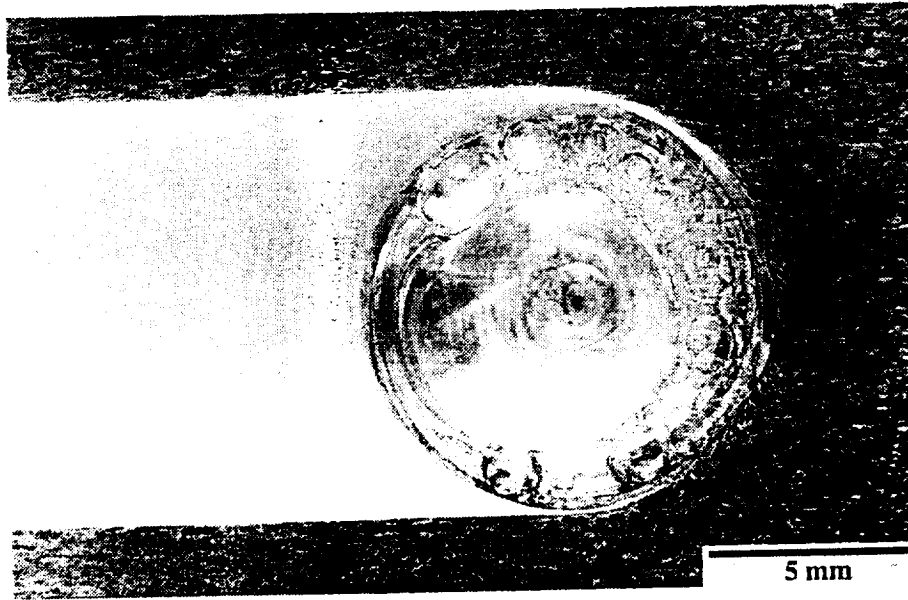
A midsection of a FS weld in 2219-T87 aluminum. Mounting compound with internal bubbles occupies the place of the pin-tool. Notice the sharply defined shear boundary, the greater thickness of the metal plug rotating with the tool on the retreating (top) side of the tool, and the so-called "tool marks" present not just on the work piece surface, but deep inside the work piece.
